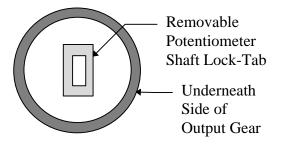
Illustration of the potentiometer shaft lock-tab inside the output gear.
